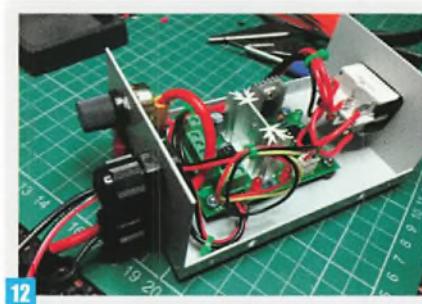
A 1:1 template to find the location of motor, drive gear and mounting hole for the backbone tubing. Fig. 8: The finished motor mount, with P-clips for the motor body and Fostner-drilled hole. Fig. 9: Slow and steady, cutting the 5mm steel with cutting fluid. Note the drill bushing at the centre of the middle disc that is removed by drilling. Fig. 10: Metal epoxy, applied with a disposable syringe sets while magnets hold the arrangement in place. Fig. 11: Finished mechanical arrangement with idler wheel to take up slack in the chain. Fig. 12: PWM controller in a box, comprising a voltage regulator down to 12V and high current MOSFET for pulse control. The rocker switch flips polarity to the motor which turns clockwise or counter-clockwise. Fig. 13: Rotation sensor comprising spring epoxied to square mounting plate, held to the underside of the driven-gear with small neodymium magnets and linear potentiometer 'finger' on a bracket that sits between coils of the spring. Fig. 14: Added Arduino and LEDs to the control box for rotation sensing of direction and angular distance.
